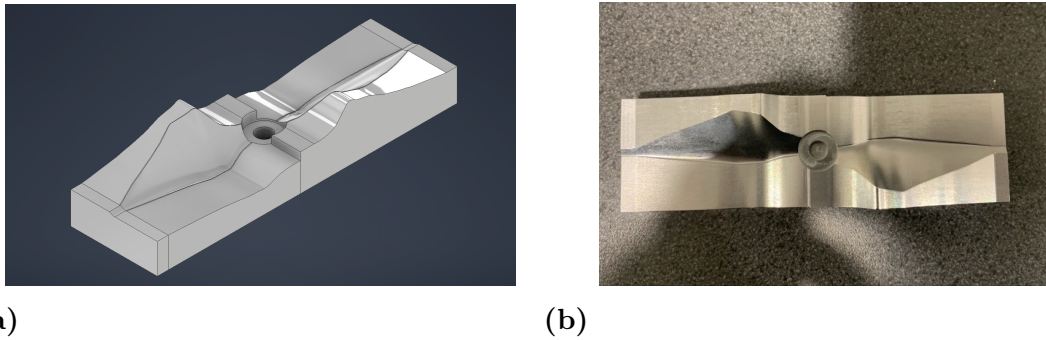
(a) CAD model of propeller mould, (b) mould milled in Al6061-T6.
